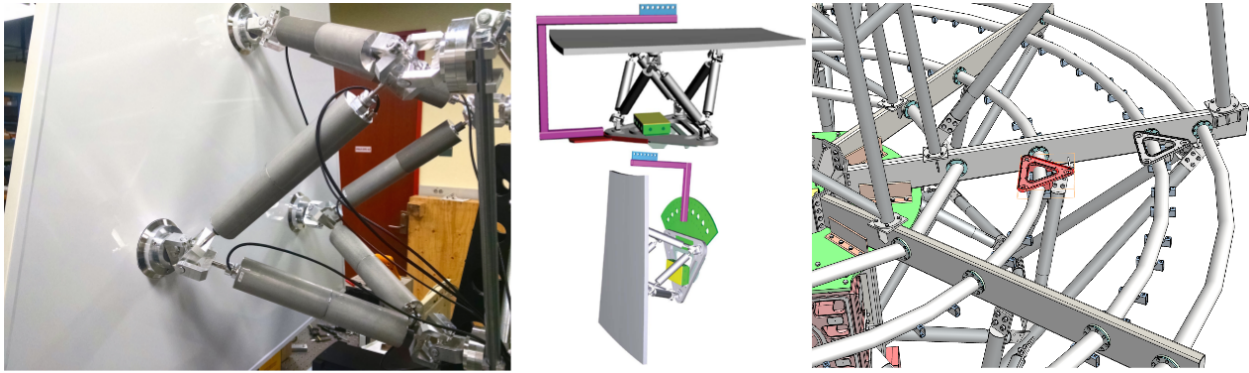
The mirror panel module and its interface with the telescope OSS. *Left*: the back of an MPM showing the Stewart platform and the attachment pads glued to the back of the mirror panel. *Middle*: a CAD drawing of the special mounting fixtures used to install MPMs on the OSS. *Right*: a CAD drawing showing the brackets and mounting triangles used to interface MPMs with the OSS.
